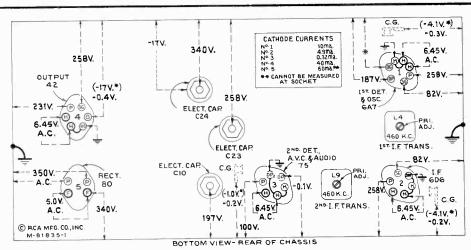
Radiotron Socket Voltages, Coil, and Trimmer Locations
